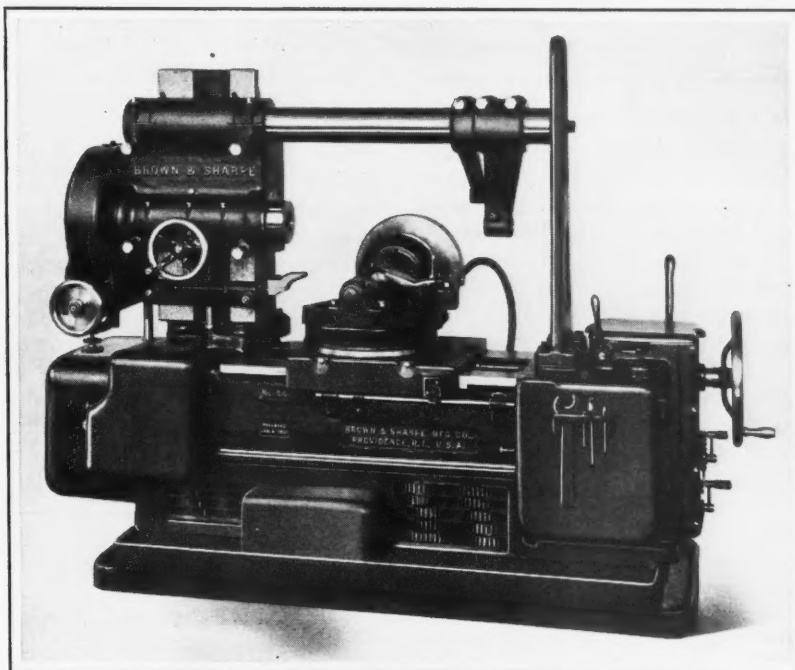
Brown & Sharpe No. 44 Spur and Spiral Gear Hobbing Machine
